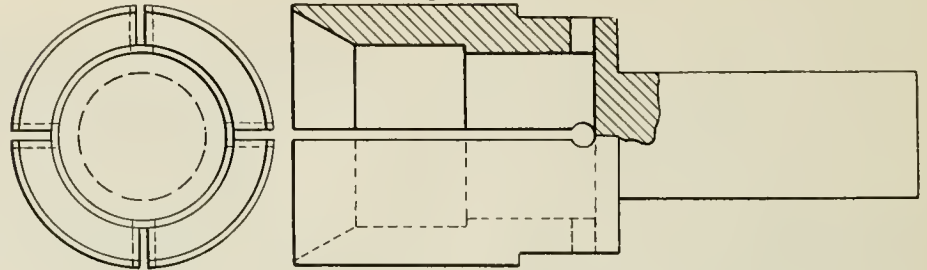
SPRING HOLDER FOR PLACING FUSE IN CHUCK
